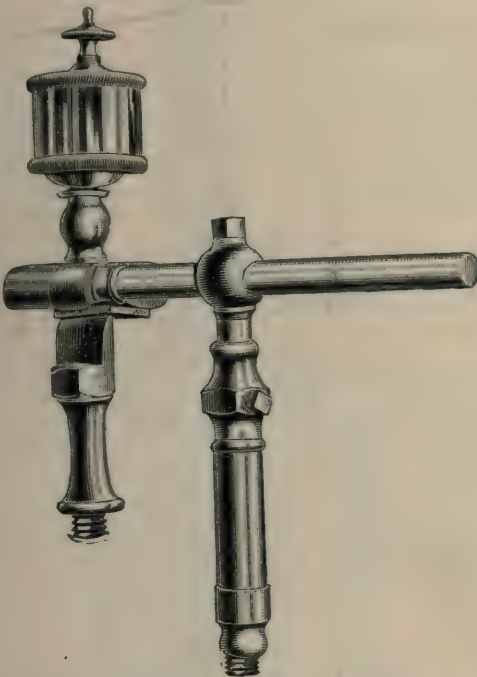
and 486. Plain Oiler Arm and Adjustable Crank Pin Oiler.
